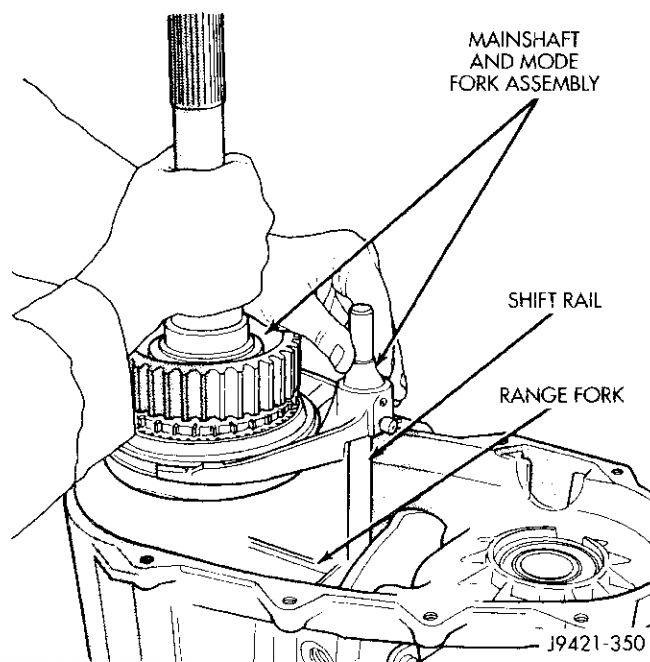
Installing Mainshaft And Mode Fork Assembly
